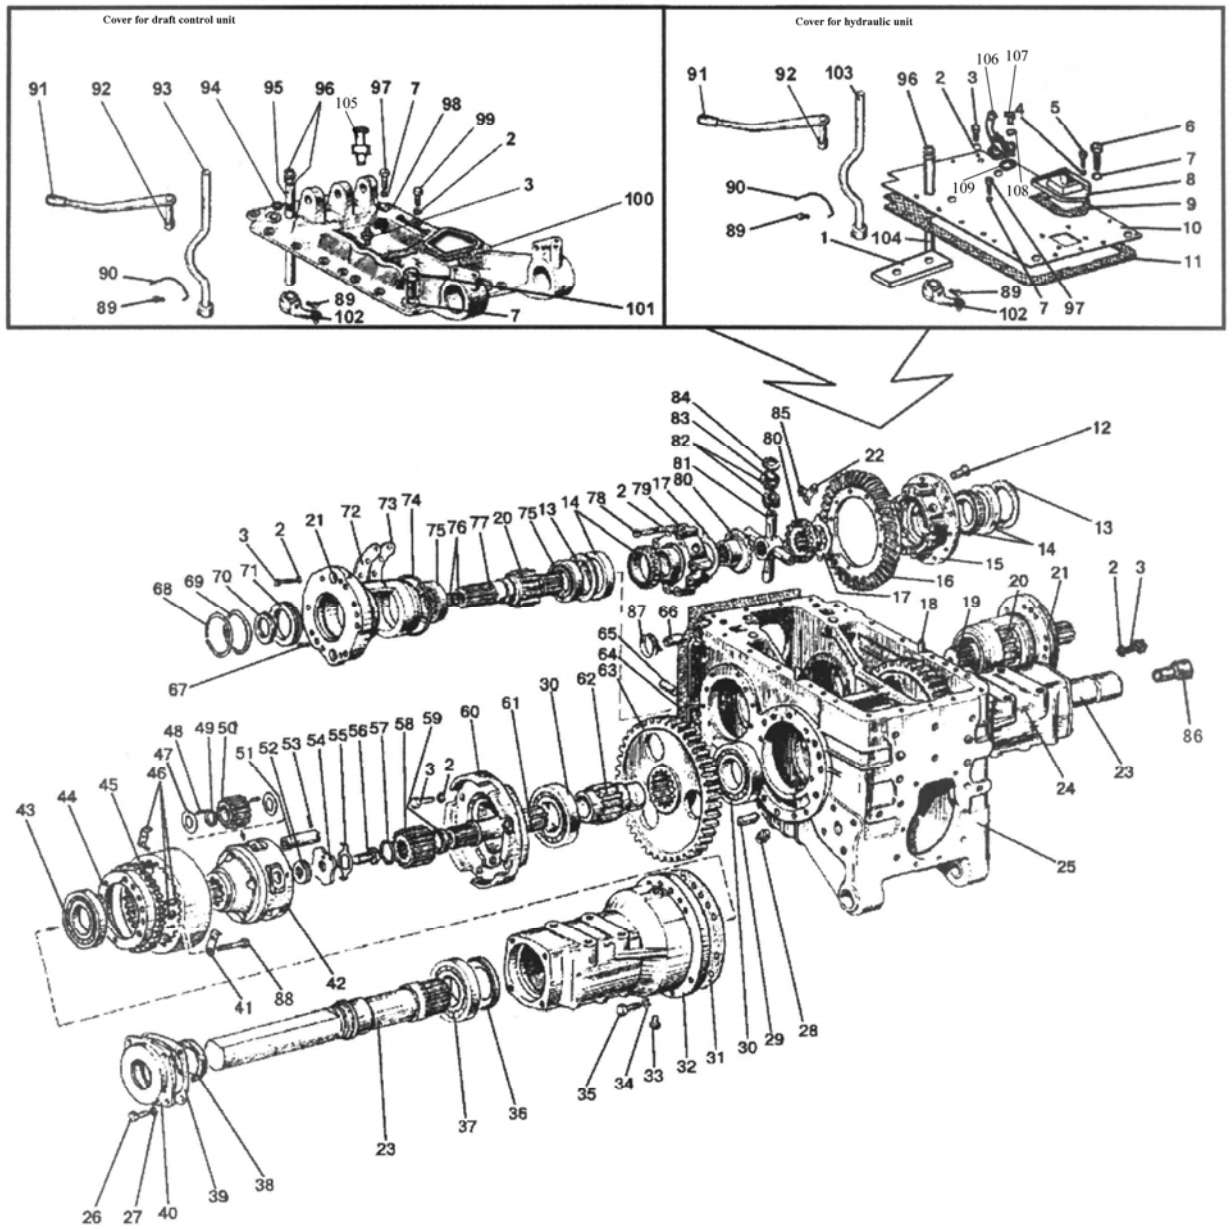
Rear axle. Differential. Final drives ("wet" brakes)
